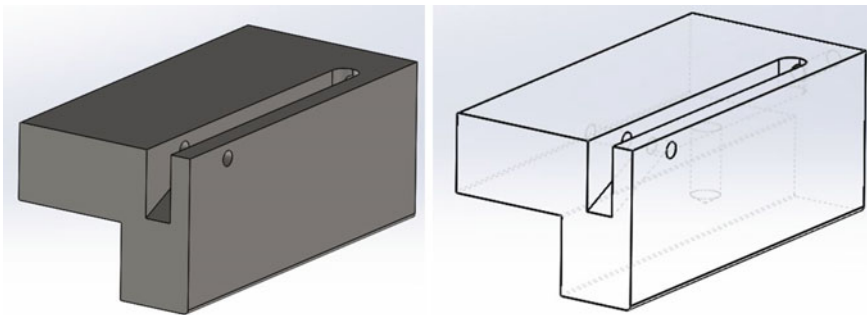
Solid and wireframe view of the tool housing (Design 3)
